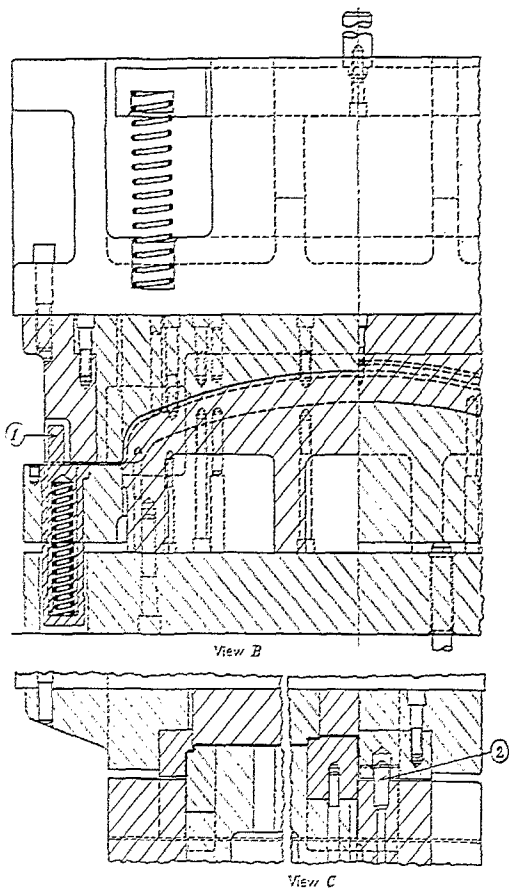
B. Draw die for the front panel of a space heater: view B, lateral cross section, and view C, longitudinal cross section. (Motor Wheel Corp.)
